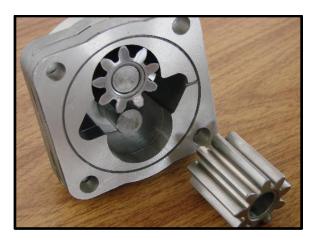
Lubricating Oil pump fitted on Deutz TBD 620 engine
